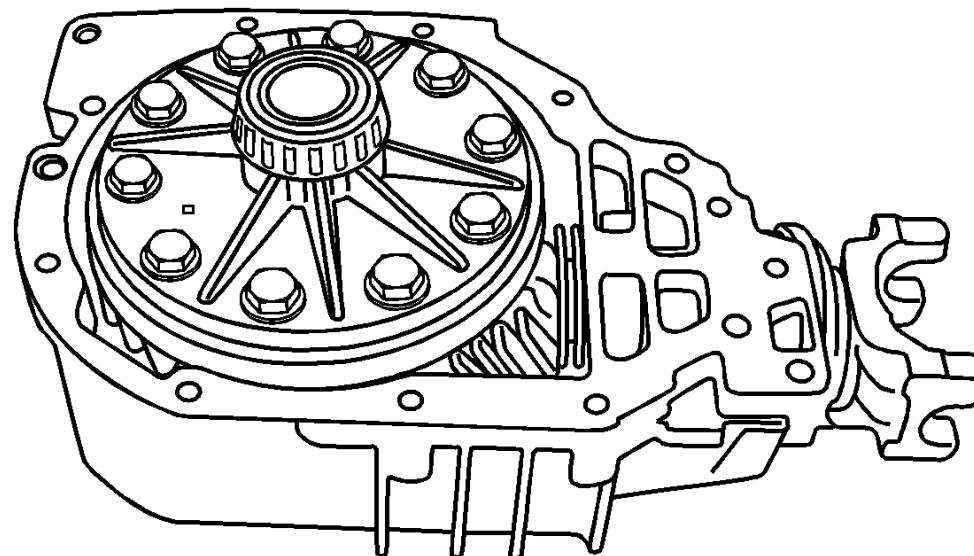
View Of Differential Case Assembly & Carrier Case Half
